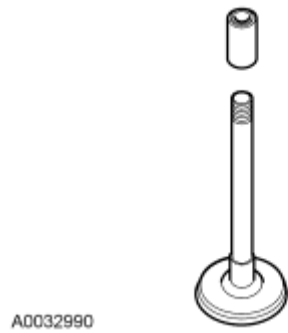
Identifying Valve Stem Seal Installation Sleeve
